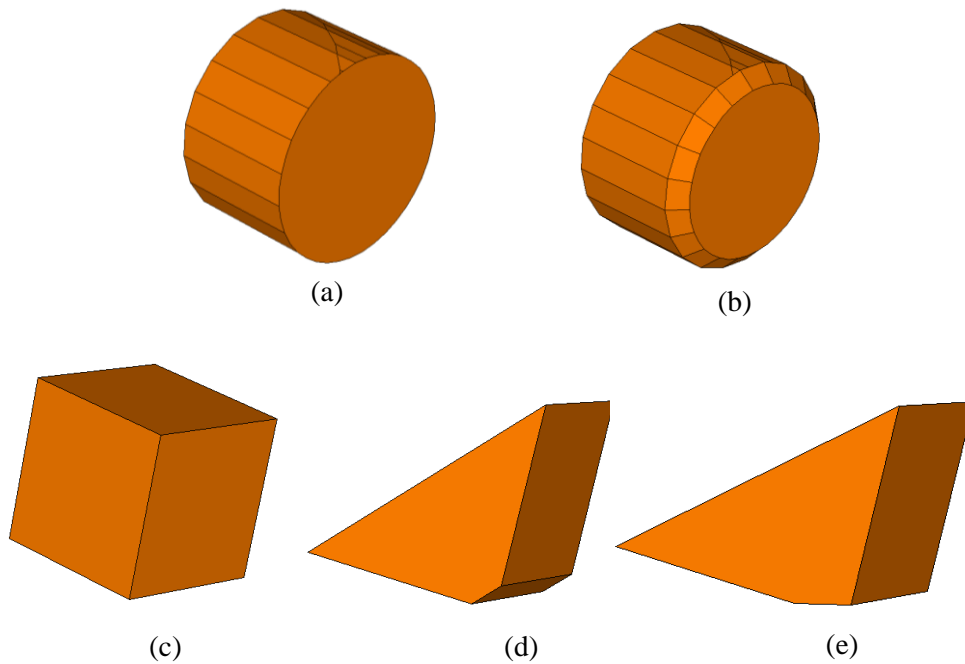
Cutter geometries used for 3D simulations: (a) sharp circular cutter, (b) circular chamfered cutter, (c) rectangular sharp cutter, (d) rectangular chamfered cutter, and (e) rectangular blunt cutter.
